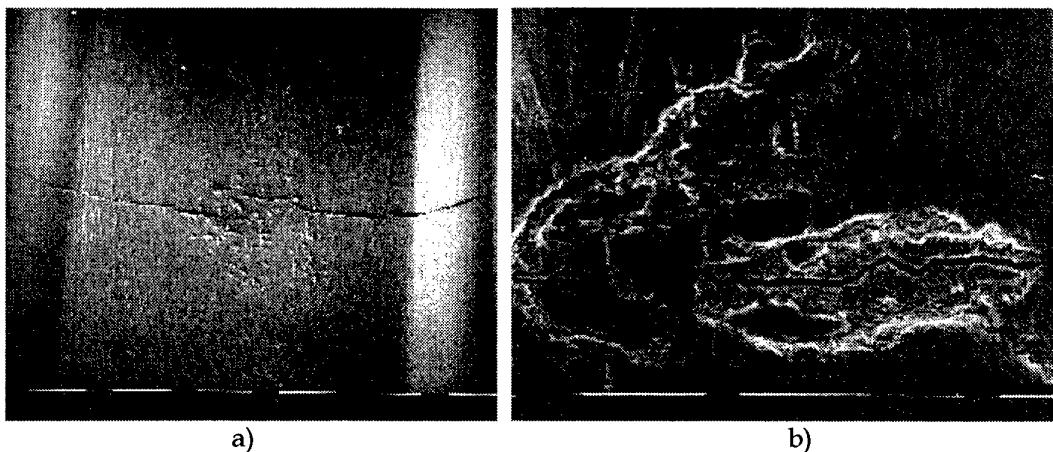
a & b. Pitting-nucleated cracks in F-111 stiffener runout.
